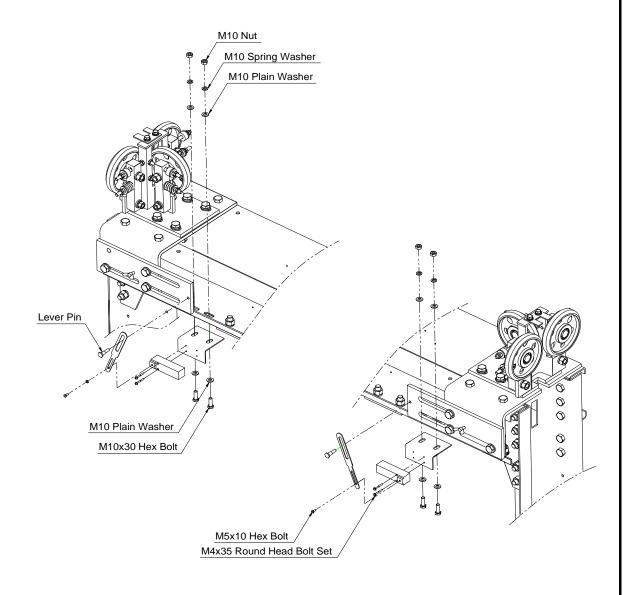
INSTALLATION OF CAR LOCKING DEVICE
